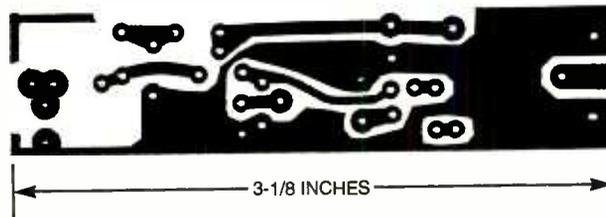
The 100-kHz-30-MHz Active Antenna was assembled in two sections—the preamp and the DC block. The preamp section was built on a small printed-circuit board, measuring 3-1/8 by 3-1/4 inches. A full-size template of that printed-circuit pattern is shown here.
